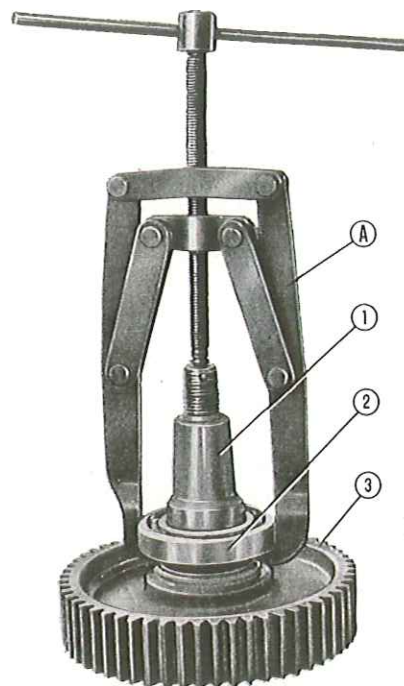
Extraction of the drive wheel shaft bearing with a universal type puller.
